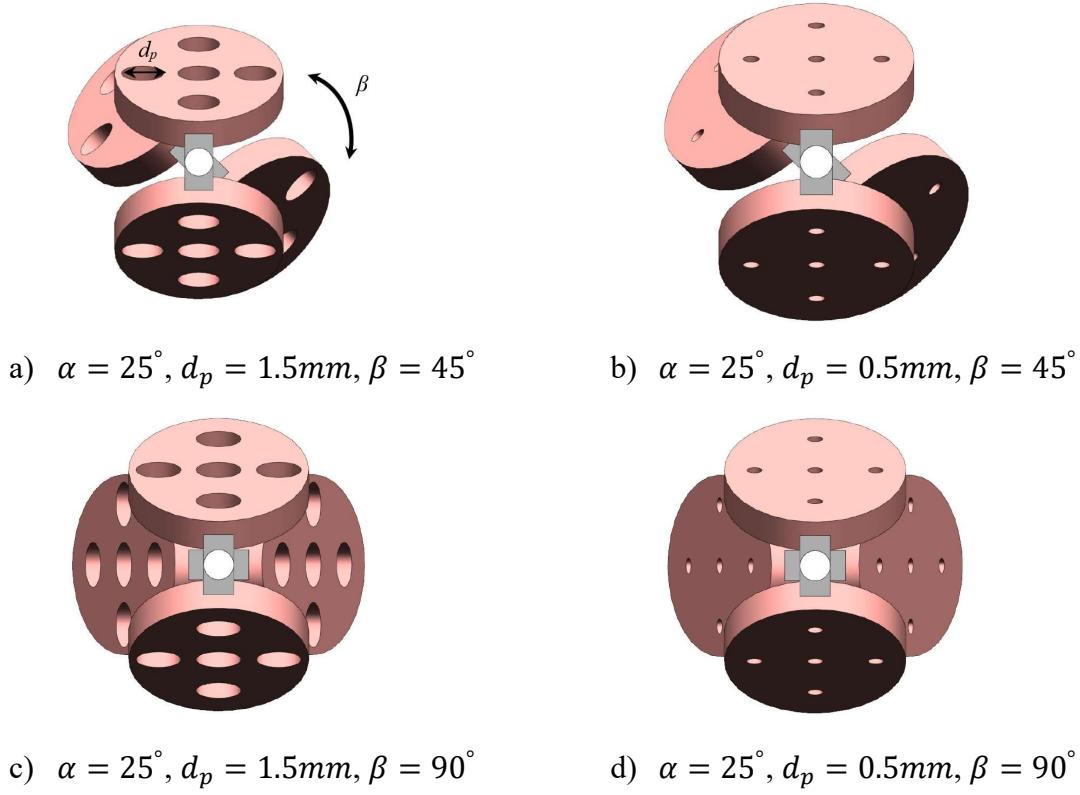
Geometrical parameters of the RIE inserts with the rotation angle (β).
